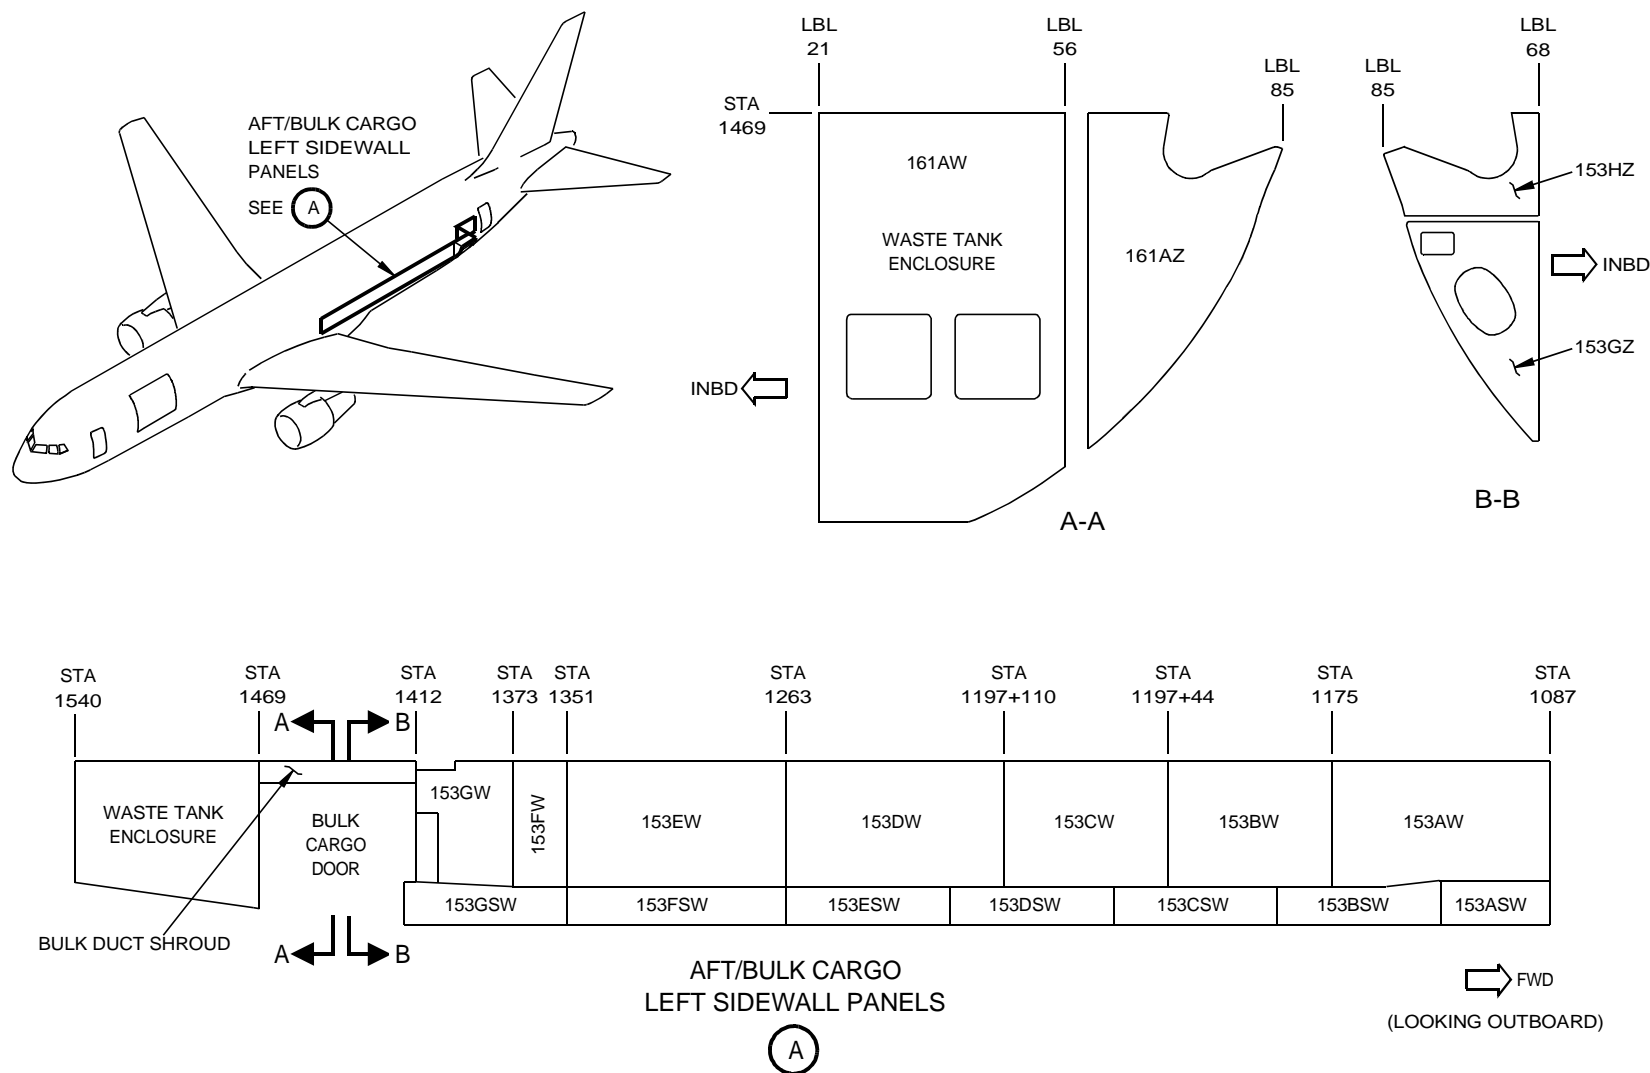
767-300BCF/GMF AFT CARGO BAY LEFT SIDEWALL PANELS (TYPICAL)
